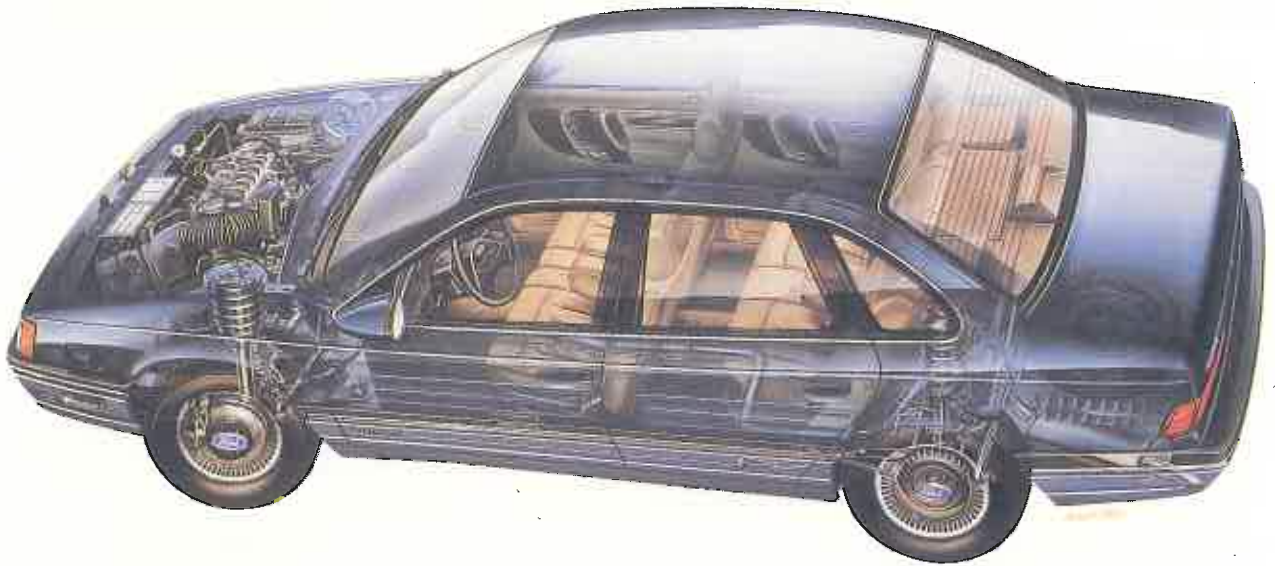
This car uses an internal combustion, intermittent combustion, reciprocating-type engine.
